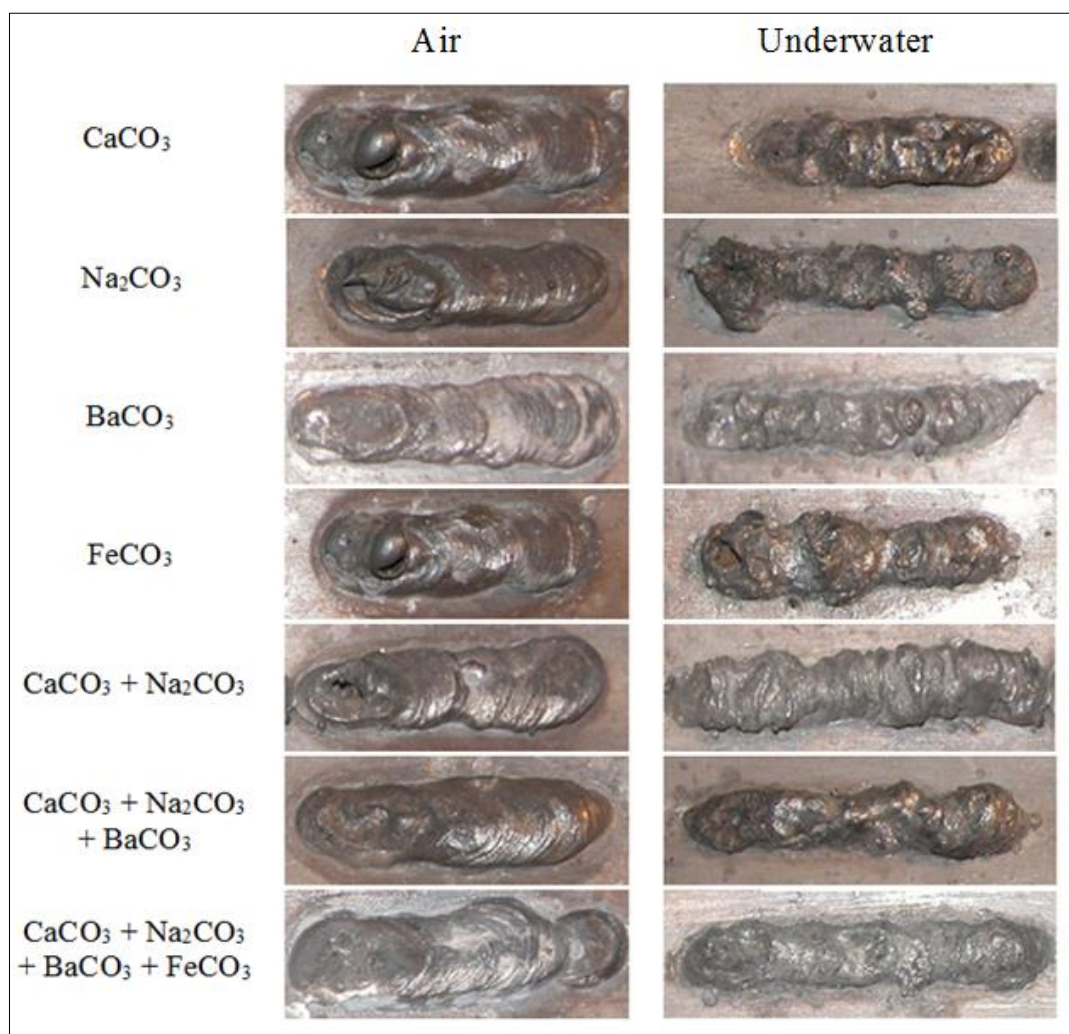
Appearance of deposits during welding using experimental wire with a different composition of carbonates in air (a) and during wet underwater welding (b)
